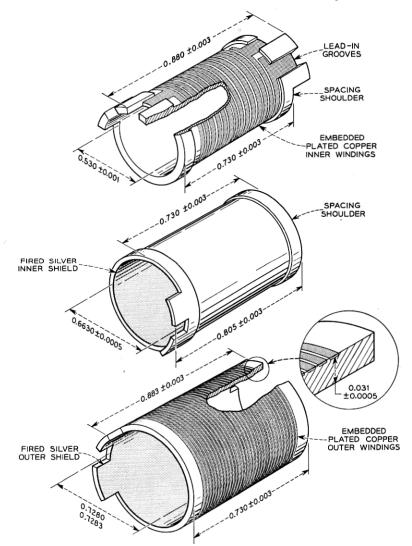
Composite view of winding forms, embedded copper windings and fired silver interwinding shields.
